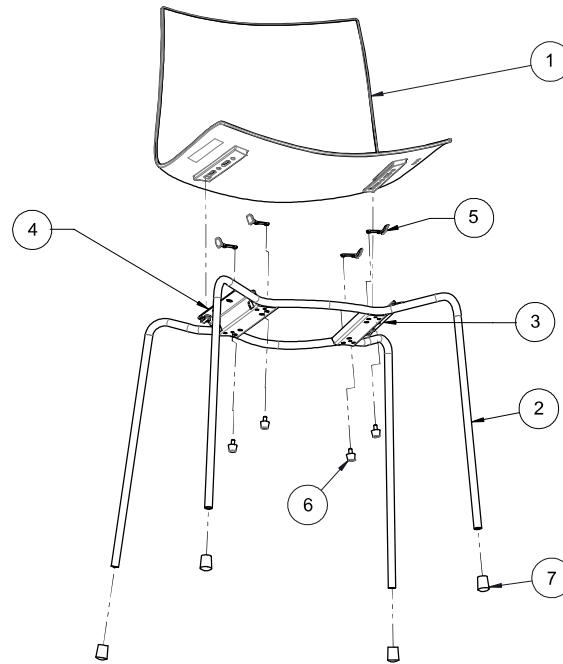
Exploded view of Catifa 46 chair with 4-legs base. PP shell; 2) 4-Legs base; 3) Trays; 4) "Clip It Easy"; 5) Hole cover; 6) Leg cap.
